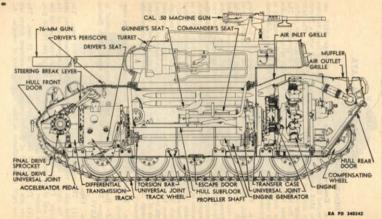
mm Gun Motor Carriage M18-Longitudinal Section
